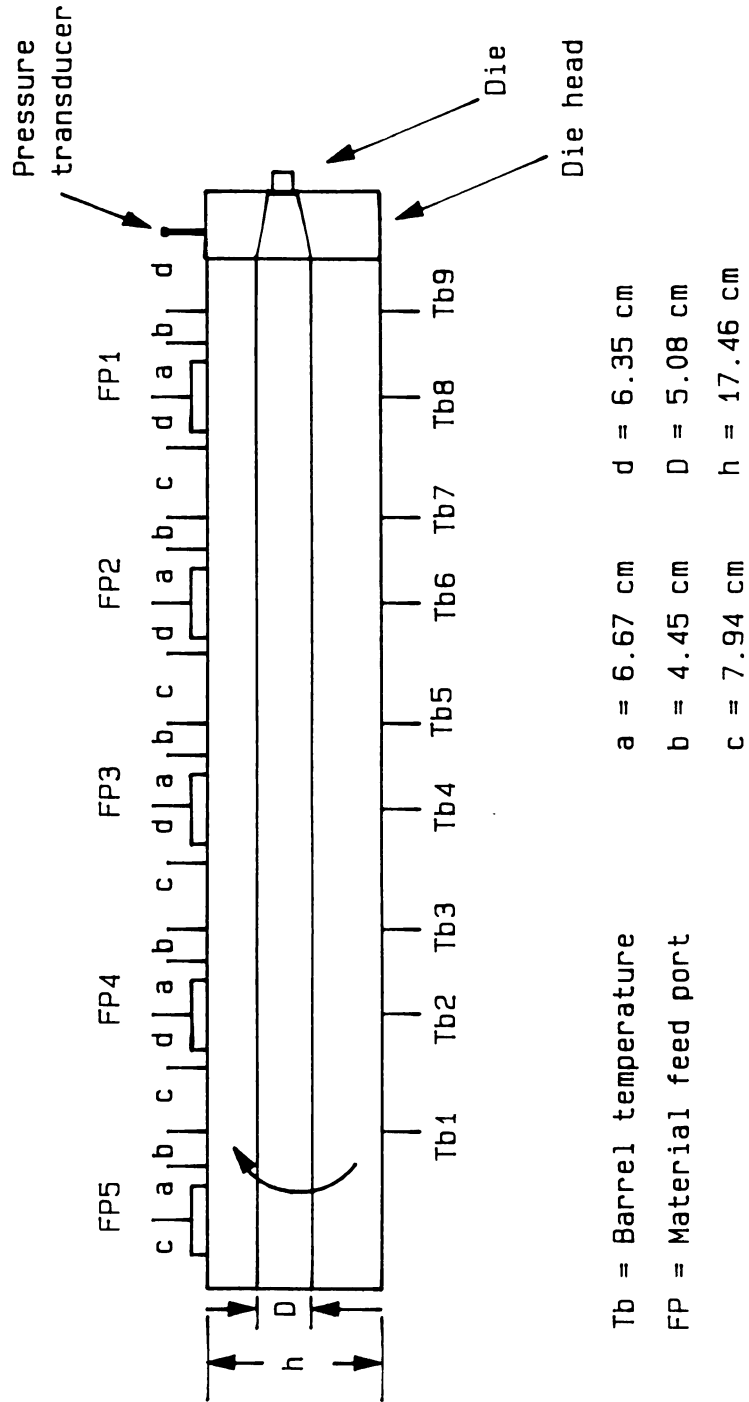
Layout of the Baker-Perkins MPF-500 twin screw extruder.
